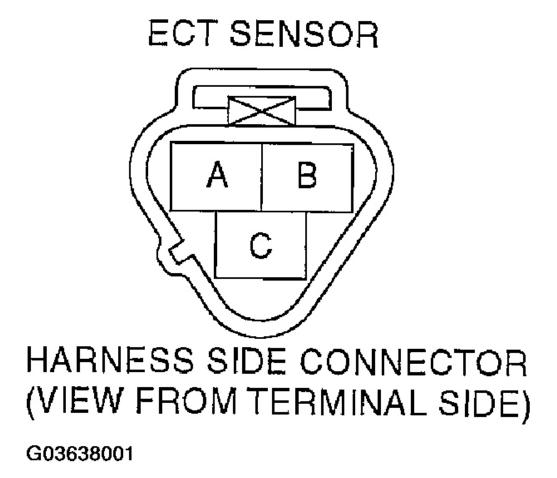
Identifying ECT Sensor Connector Terminals Courtesy of MAZDA MOTORS CORP.
